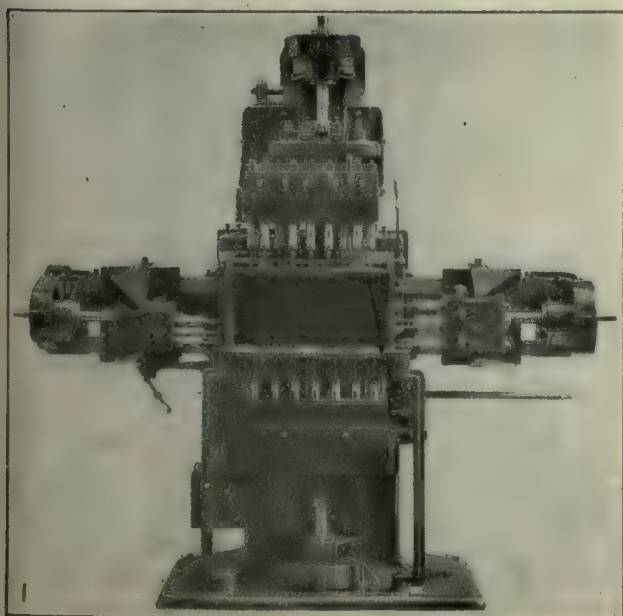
EARLY TYPE FOUR-WAY DRILLING MACHINE
